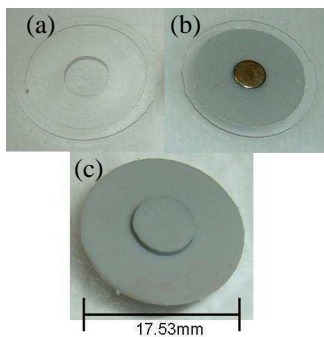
(a) View of the polycarbonate mold. (b) A membrane midway through the fabrication process. (c) A completed membrane with encapsulated magnet.
